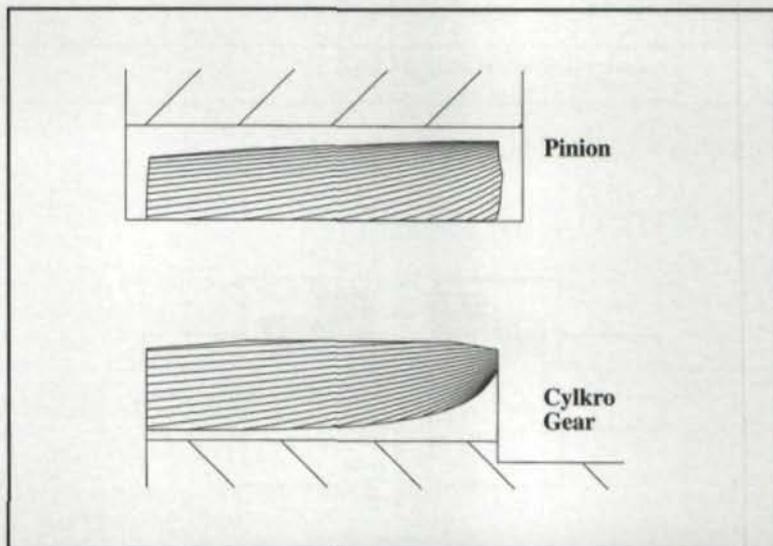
Lines of contact at the pinion and the Cylkro gear flank.
